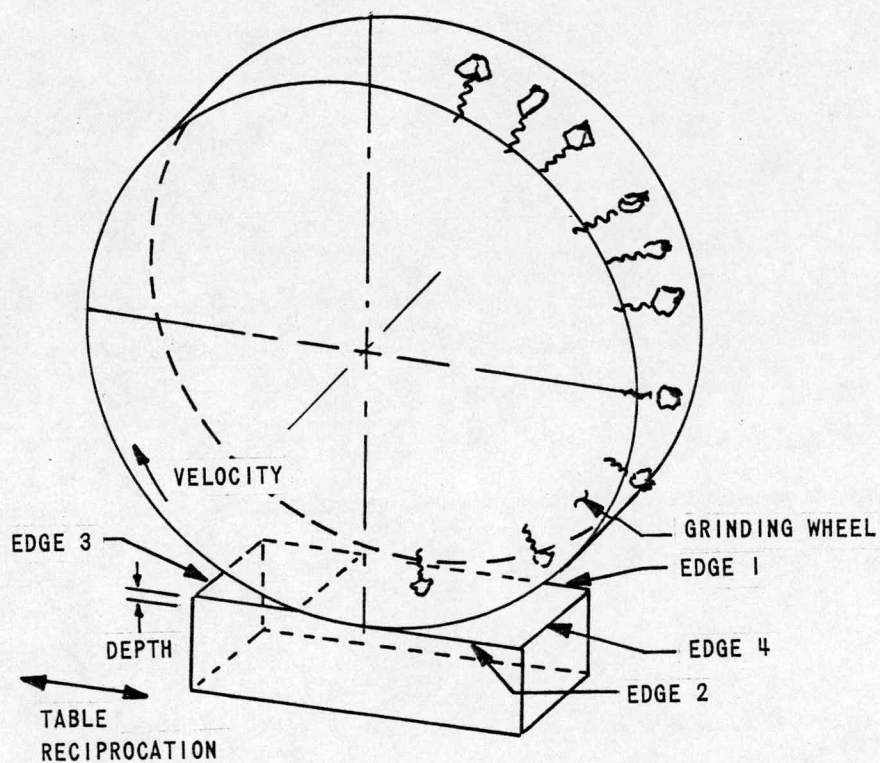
Identification of Workpiece Edges at Which Burrs Form
